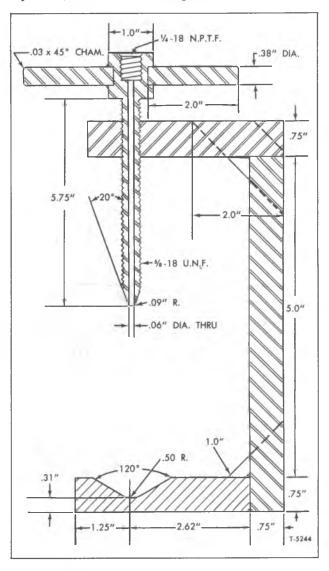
Brake Bleeding Tool for Split System Master Cylinder
